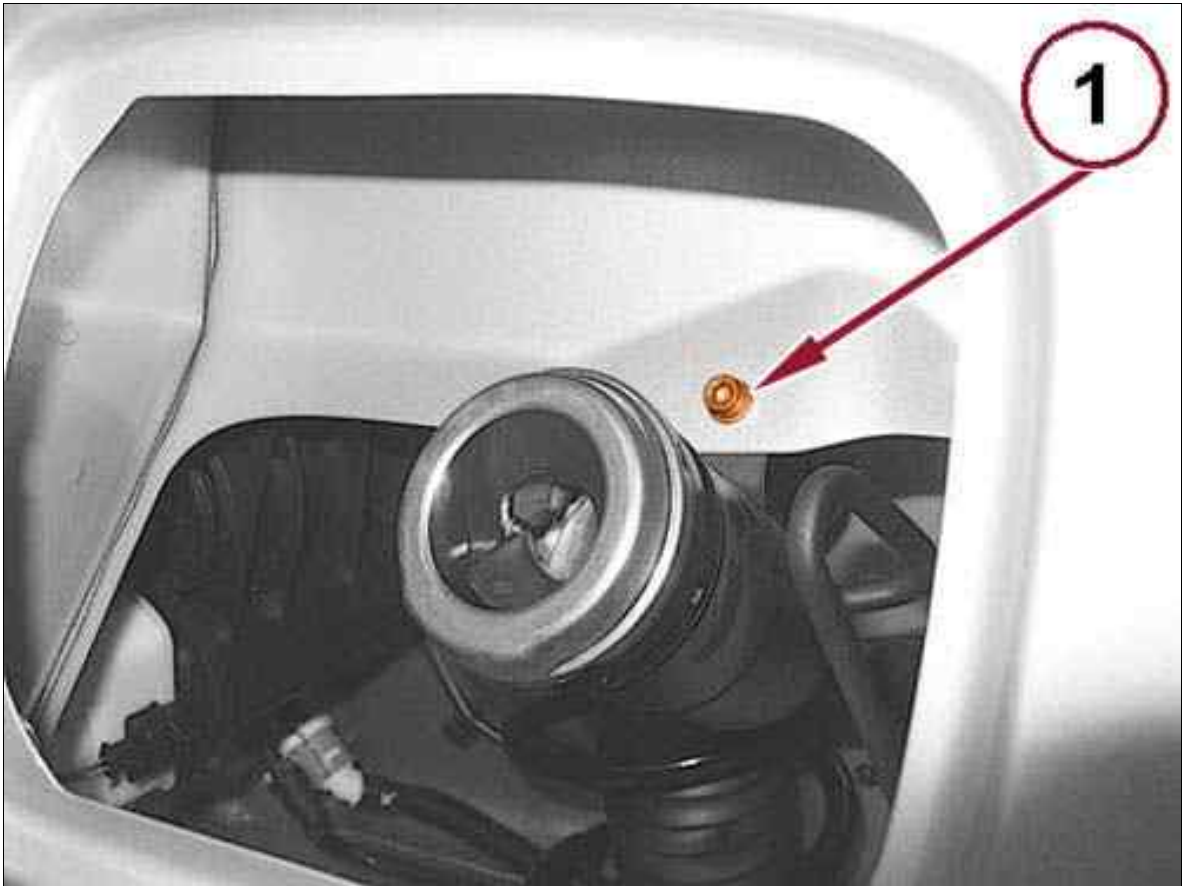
Door Retention Device, Fuel Door, Clips & Screw
